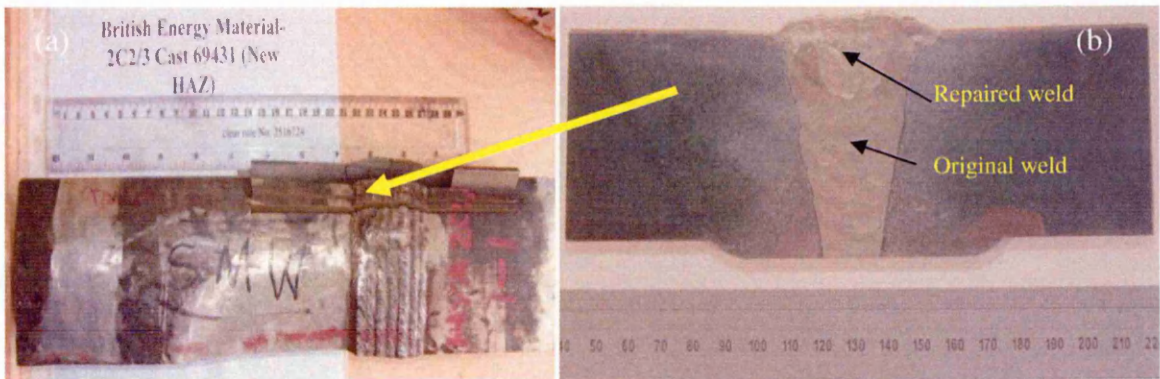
Photographs of ex-service Type 316H stainless steel weldment (Weld-2) showing: (a) weld location on the component, and (b) the weld profile.
